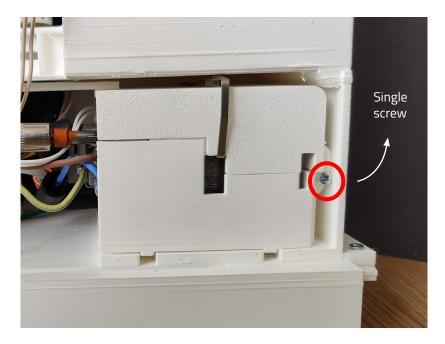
Single screws that holds the boiler unit together and secures it to the inner housing
